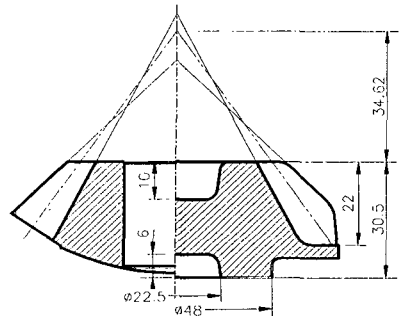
Machined(left) and forged(right) drawing for the worm forged bevel gear
